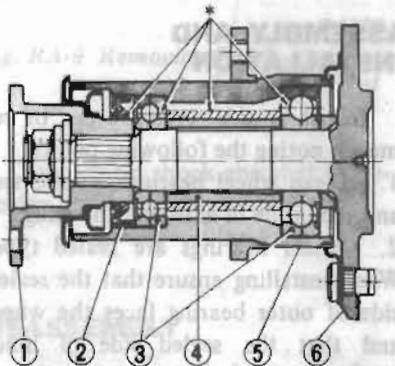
Marking Position of Bearing Housing and Distance Piece
